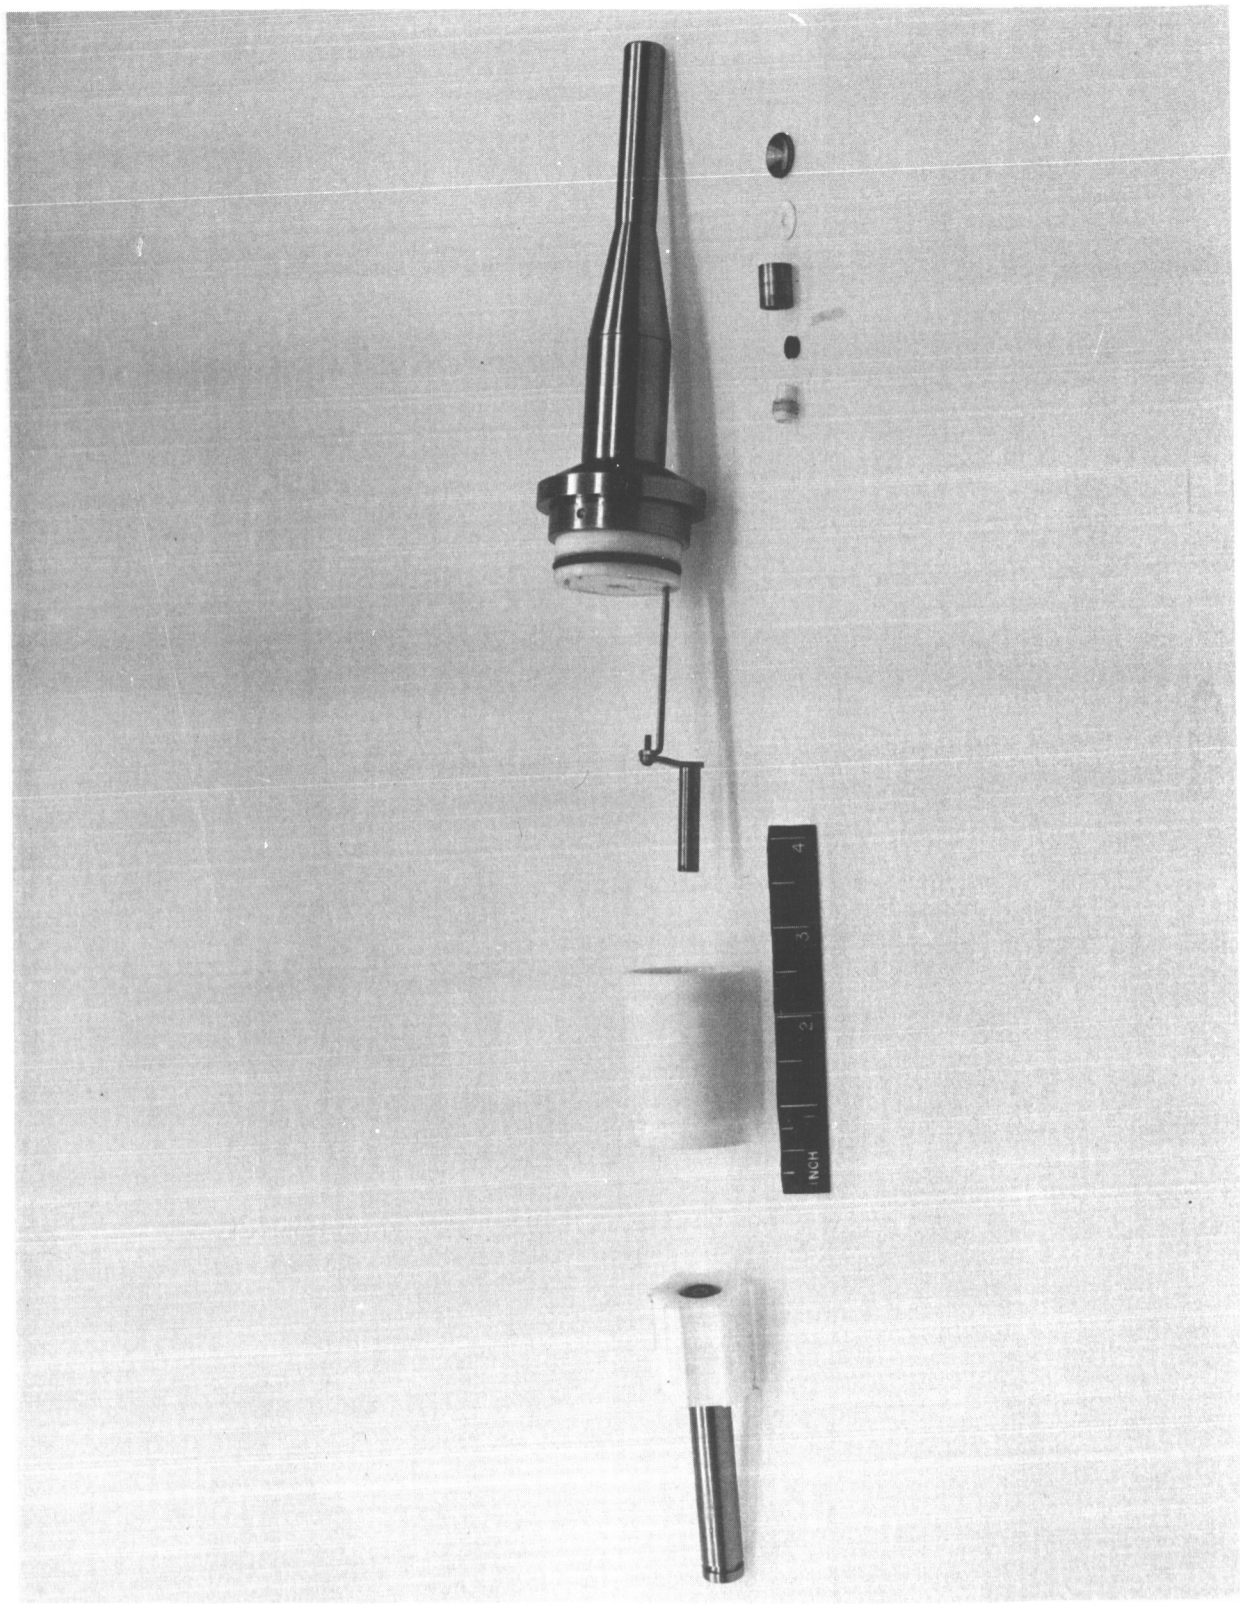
Exploded View of Central Electrode Assembly, Tip and Interior
